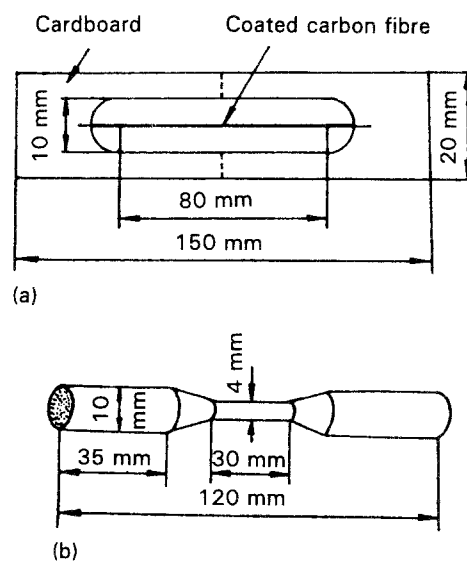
Specimen geometries for tensile tests: (a) coated carbon fibre; (b) C/Al composite.
